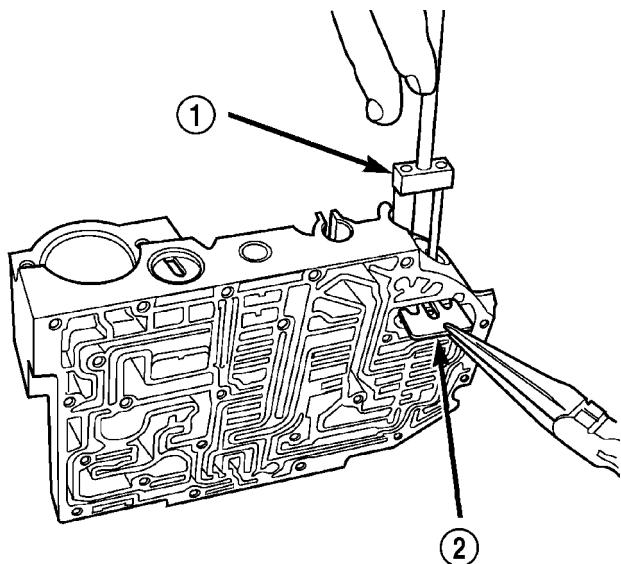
Install Regulator Valve Spring Retainer using Tool 6302
